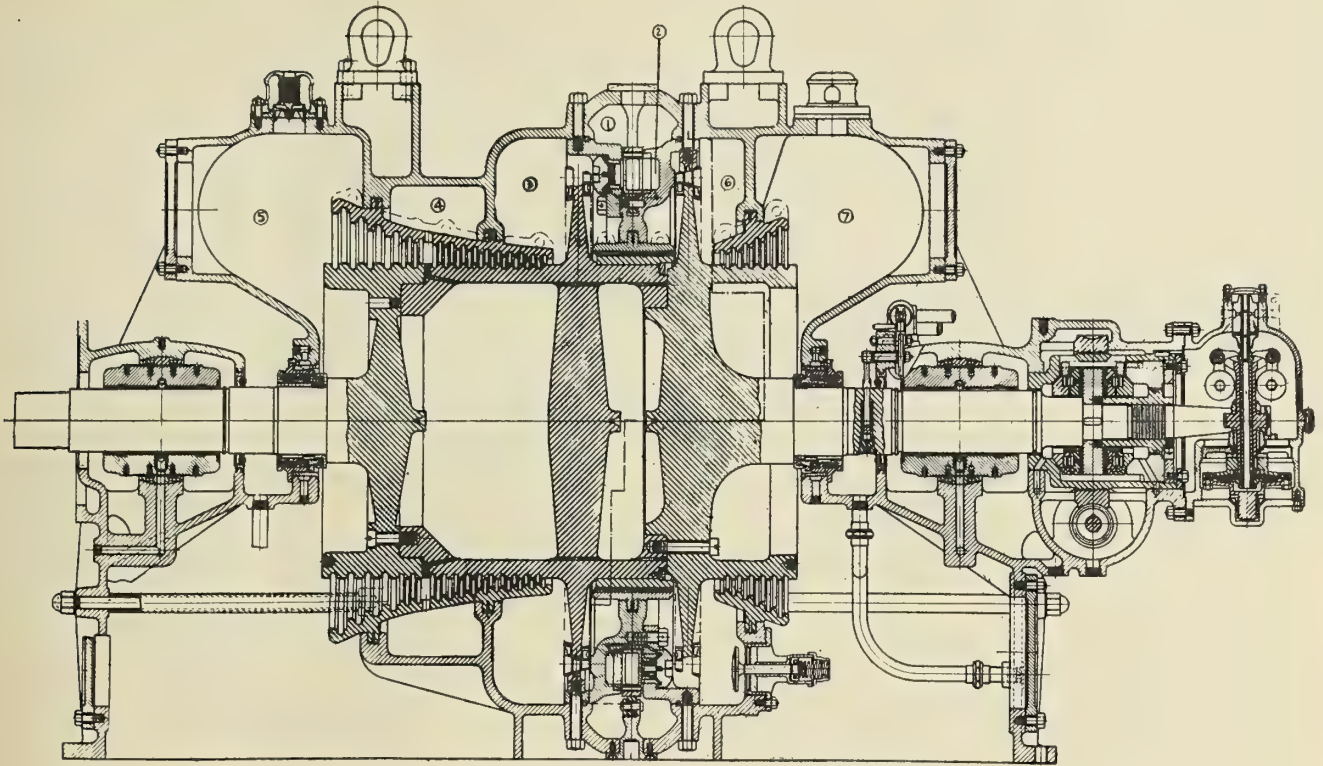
Sectional Elevation of Completely Assembled Turbine
